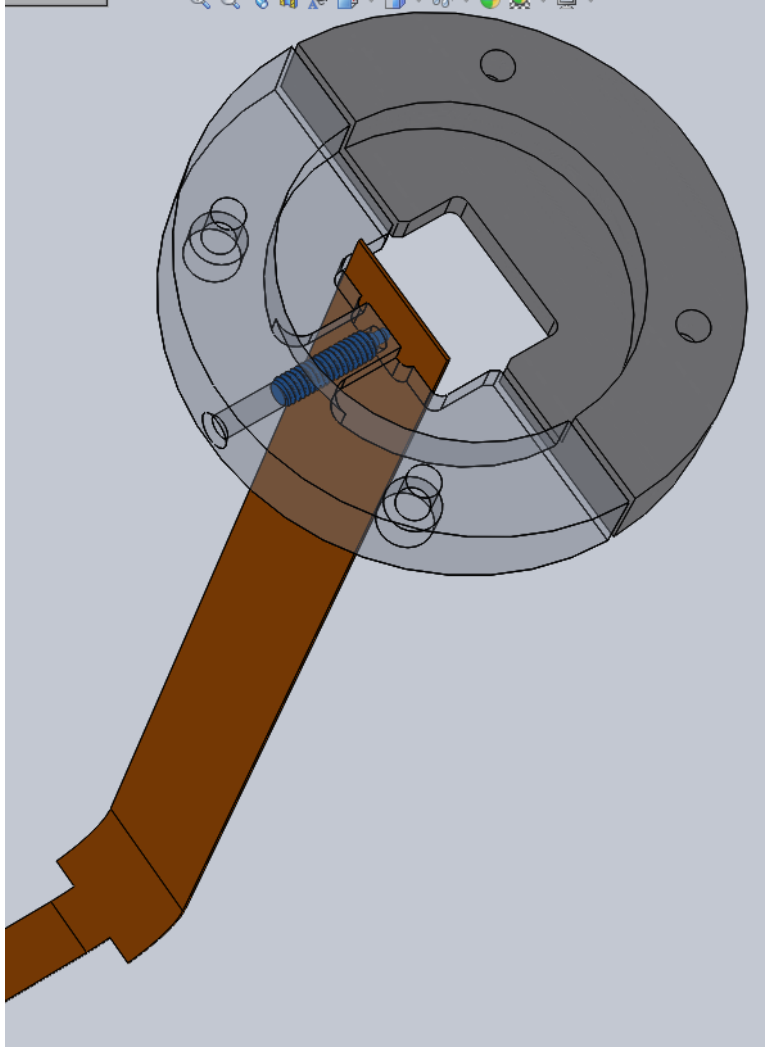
Assembly of the ball plunger within the piston guide piece while in contact with the HotPot.
